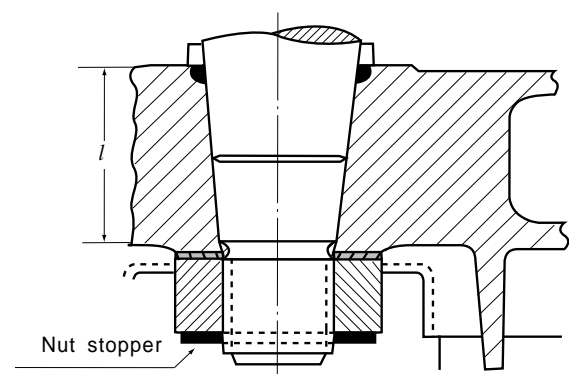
Cone Coupling with Hydraulic Arrangements
